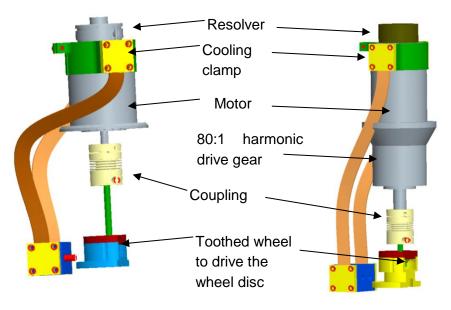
The main parts of the wheel drives. Left: one of four identical filter wheel power trains, right: the power train for the cold stop wheel
